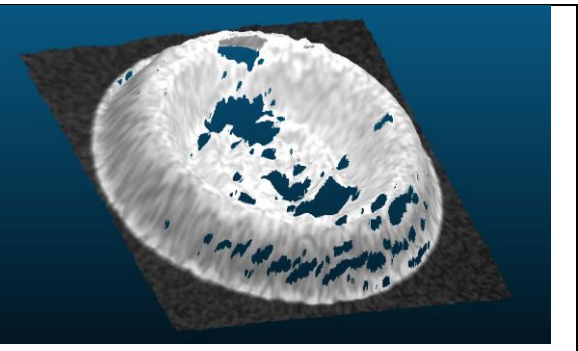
3D scan of a 3D printed Bessel artifact using Sensor E2
